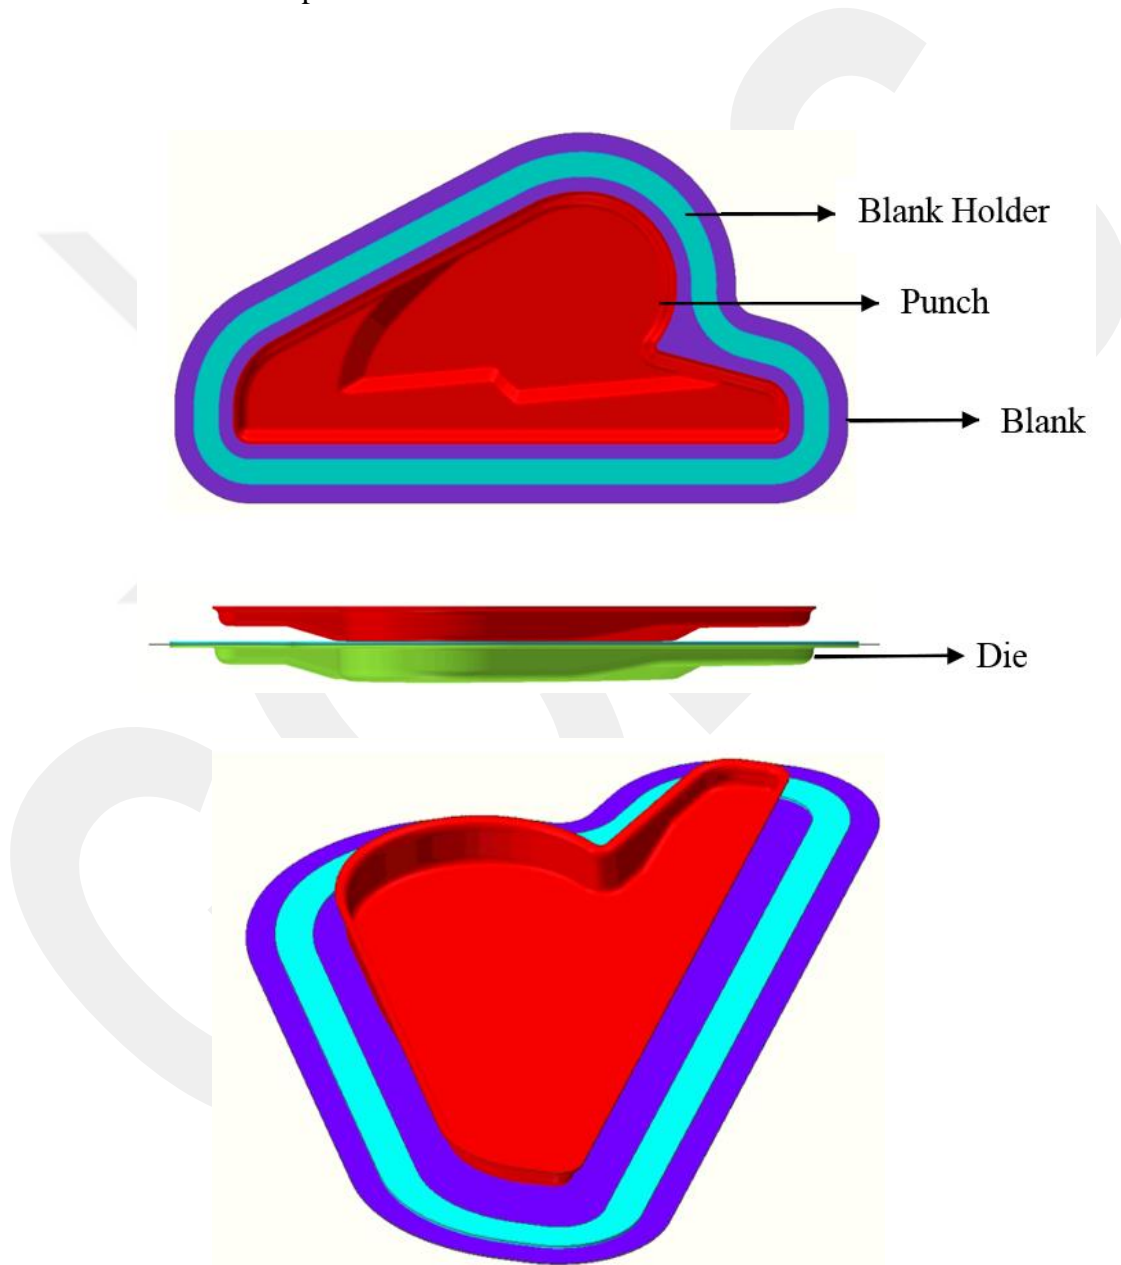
The top, front and isometric views of the die set for forming the first design cooling group's sheet metal cover
